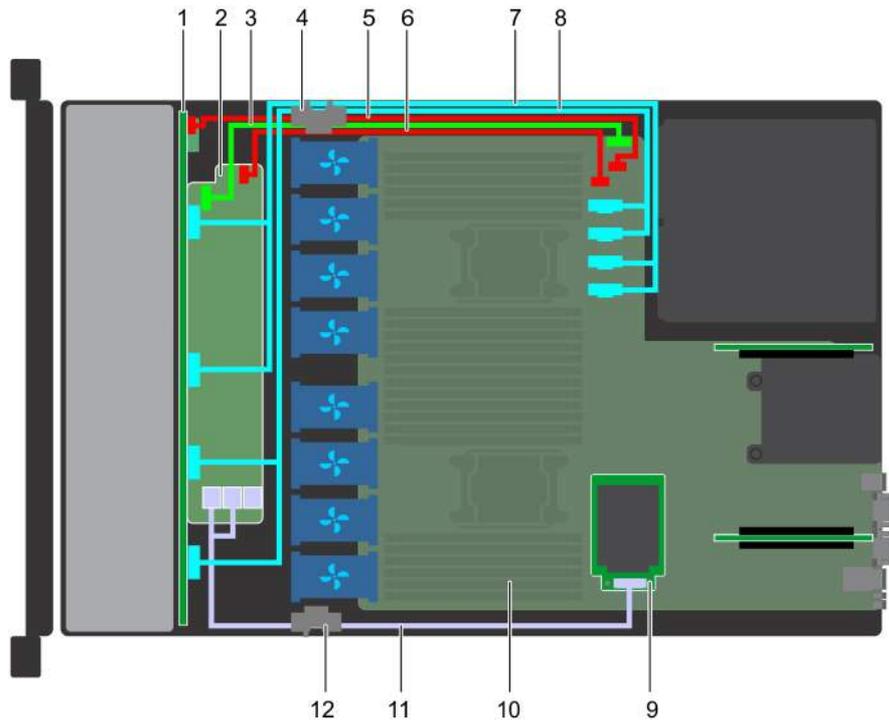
Cable routing - 10 x 2.5 hard drive backplane with mini PERC
